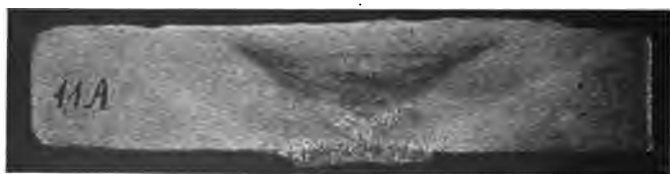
Excessive superheating in lower part of a welding seam.
